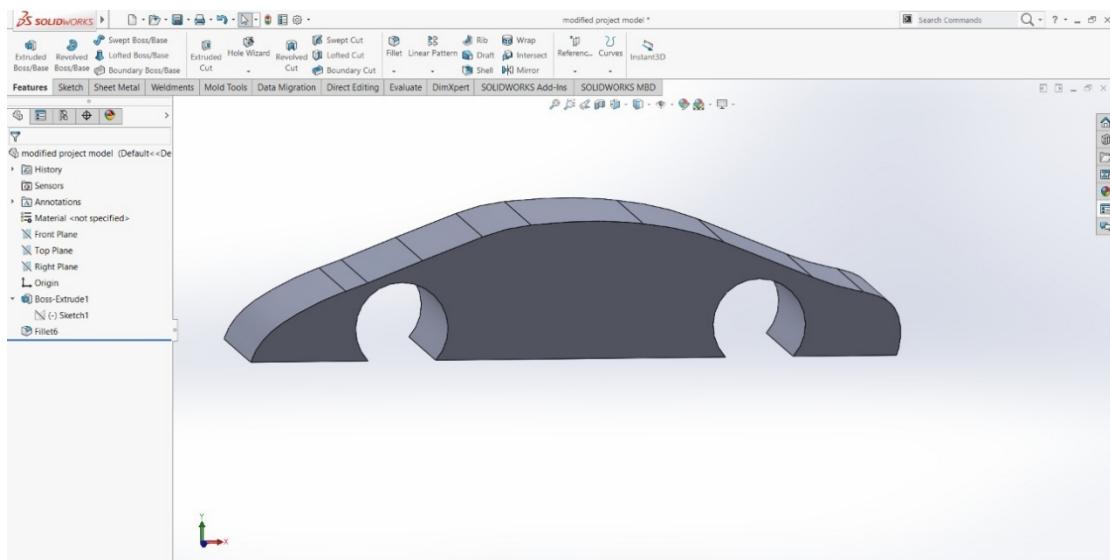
Drag Minimised Model Dimensions with 3D View
